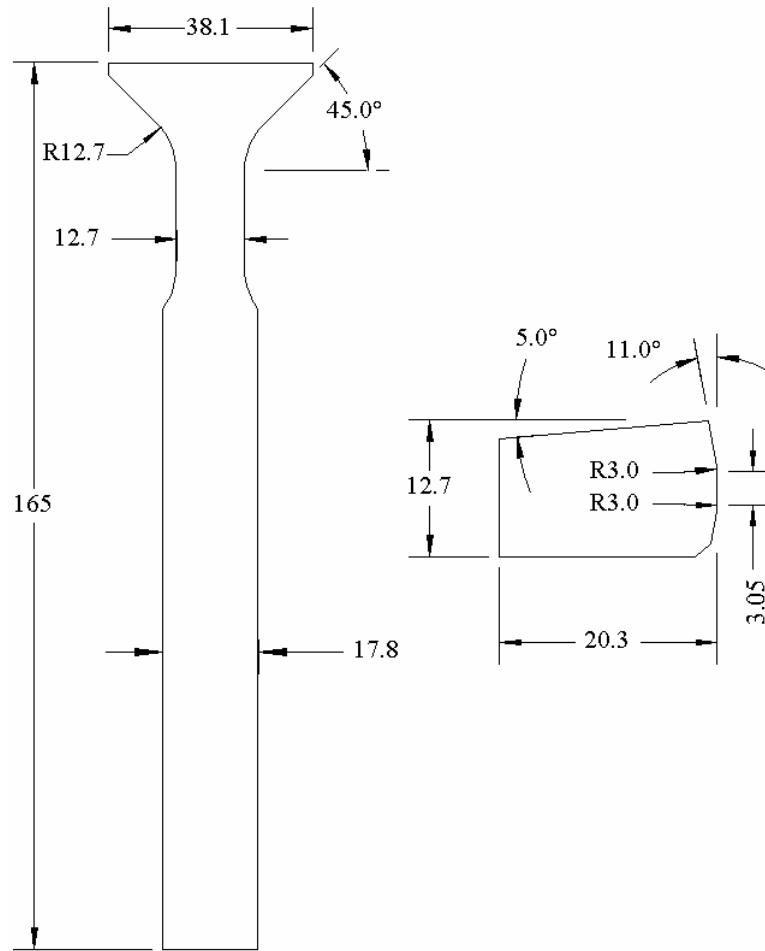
Drawing and dimensions (mm) of fretting specimen and pad
